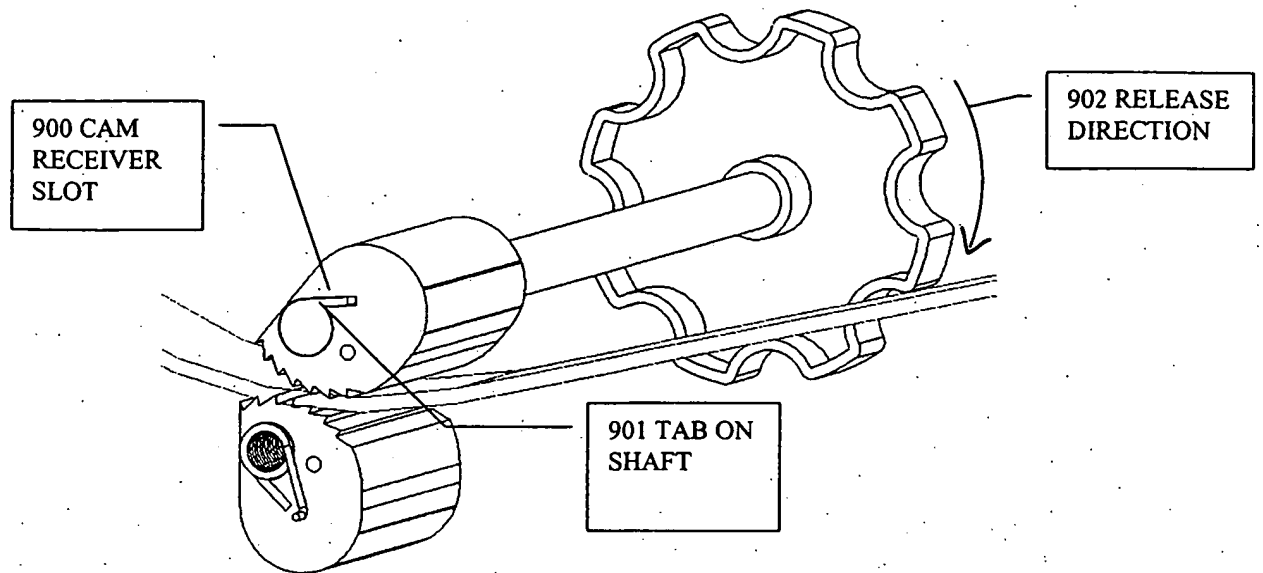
A detail view of the External Handle, Shaft, and Cams. Note: The spring in the upper cam is not shown for clarity in the figure. Handle is shown on opposite side from that shown in Figure 8.
